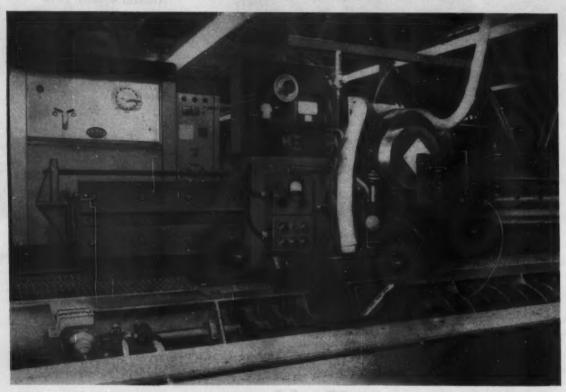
Huge boom type welder which runs on track 50 feet long used for work held in five positioners located at the sides of the track.
